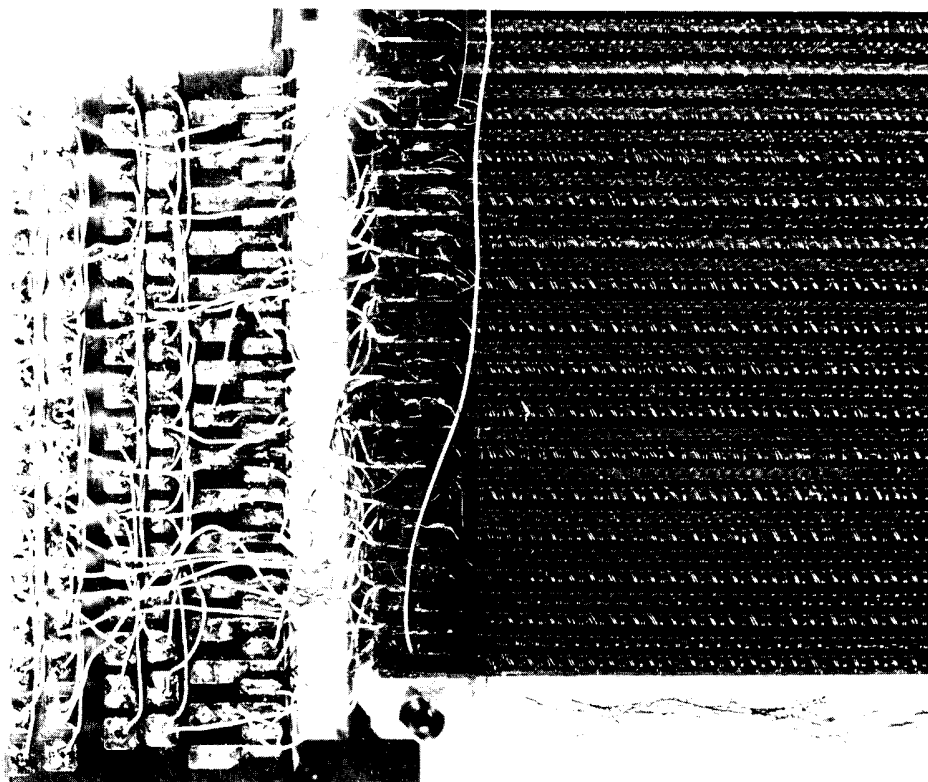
Assembled Memory with Connections to Printed Circuit Boards
